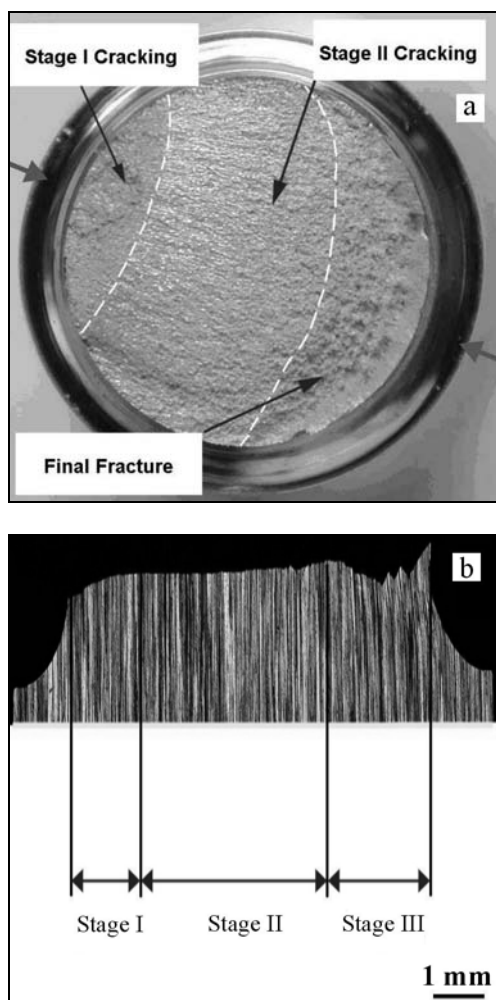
Overall fracture surface of the sample 5-14-AA2015-T2 tested at 150 MPa, 1.3 mil. cycles to failure (a). Section through fracture area of the same sample 5-14-AA215-T2 (b).
